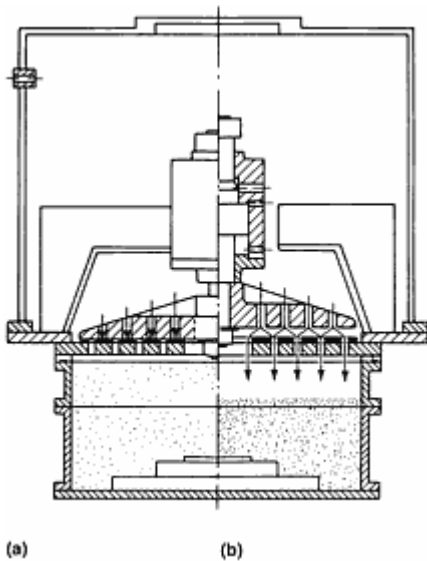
Essential components of a high-pressure jolt-squeeze molding machine. The compensating head equalizes the pressure applied to each floating peen block as the sand filled flask is hydraulically raised against the peen blocks. This develops a uniformly dense packing of molding sand against the entire surface of the pattern.
